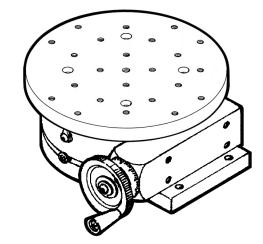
The tooling plate is shown mounted to a 4"Sherline rotary table.
